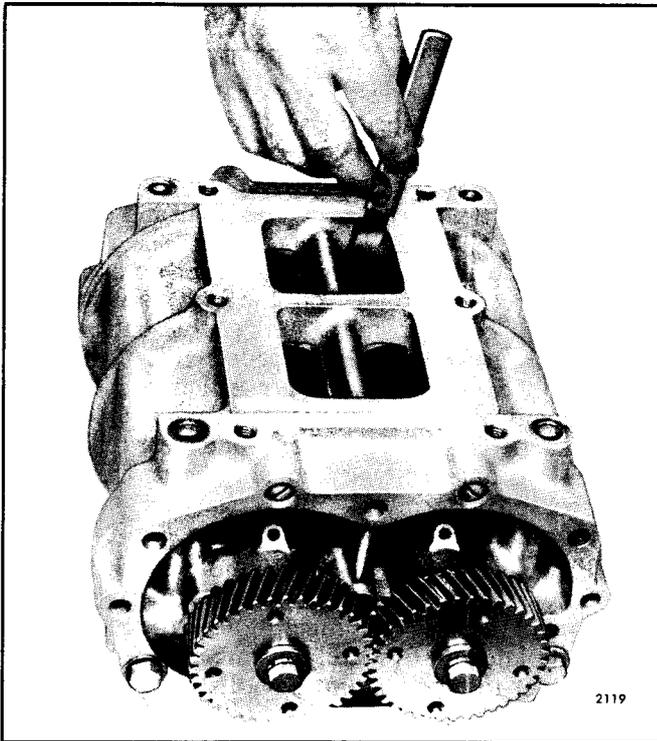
Measuring Rotor Lobe to End Plate Clearance
